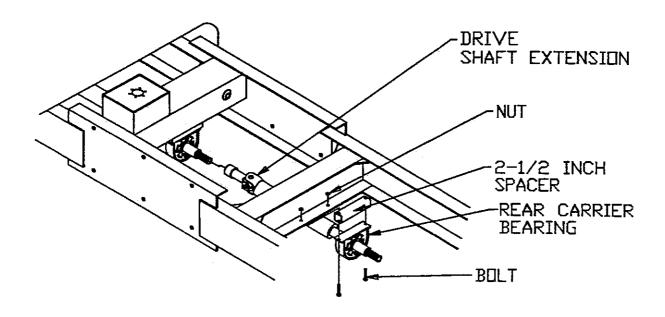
REAR CARRIER BEARING INSTALLATION
